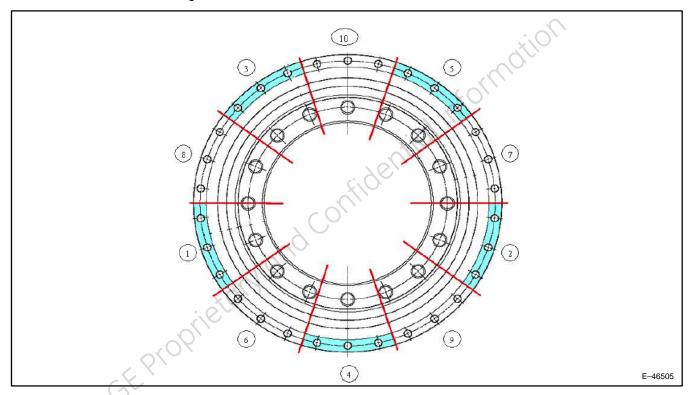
Flex Plate/Flange Bolt Installation Pattern.
